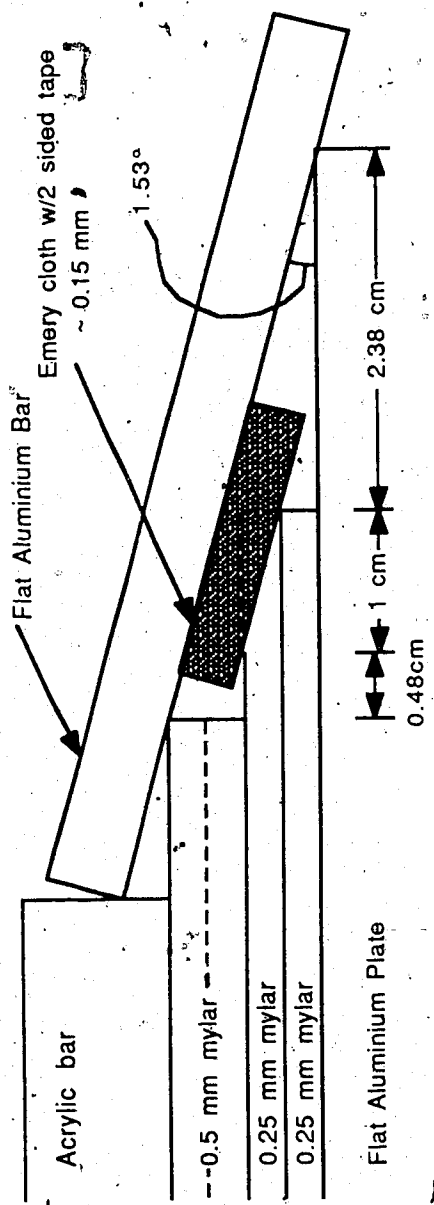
Schematic side view of Sanding Jig for tapering longitudinal lap joint of cylinder.
